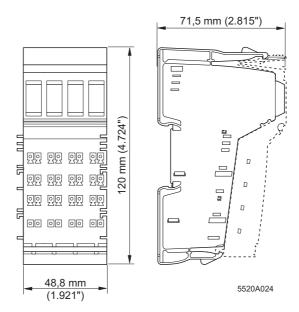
Dimensions of the electronics base (4-slot housing)
